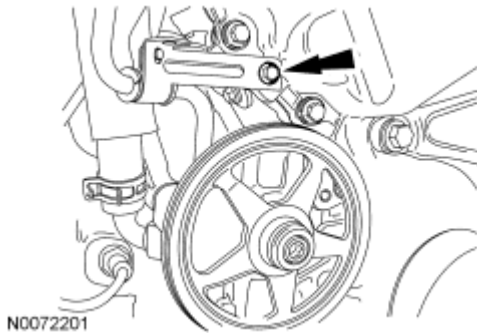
Identifying Bracket-To-Power Steering Pump Bolt
